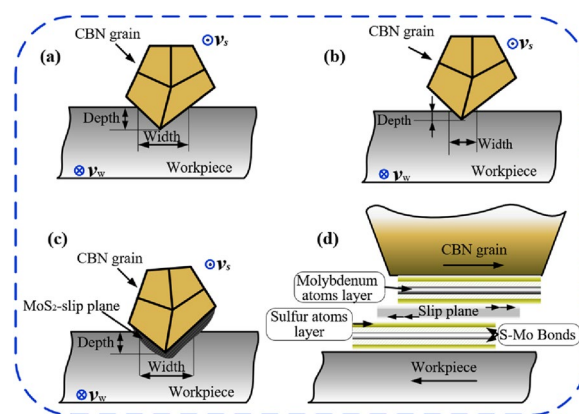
Friction and wear model of abrasive grains in solid lubricating coating: (a) Cut into workpiece, (b) Slip on workpiece surface, (c) Solid lubricated grain cut into workpiece and (d) solid lubrication mechanism
